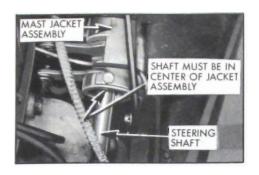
Steering Shaft to Mast Jacket Alignment
